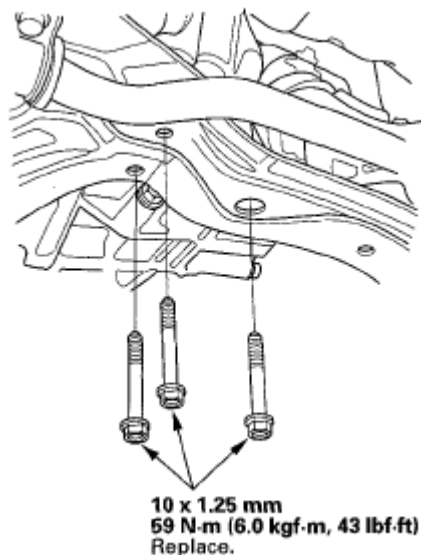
Identifying Bolts For Rear Transmission Mount With Torque Specification
